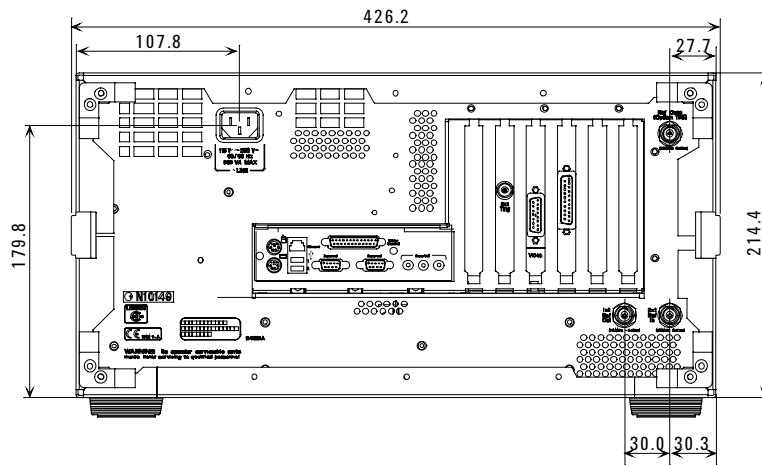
Main unit dimensions (rear view, in millimeters, nominal)
